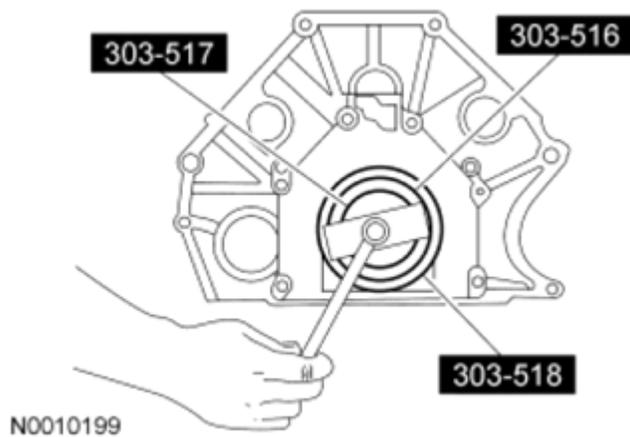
Installing Crankshaft Rear Oil Slinger Using Special Tools
